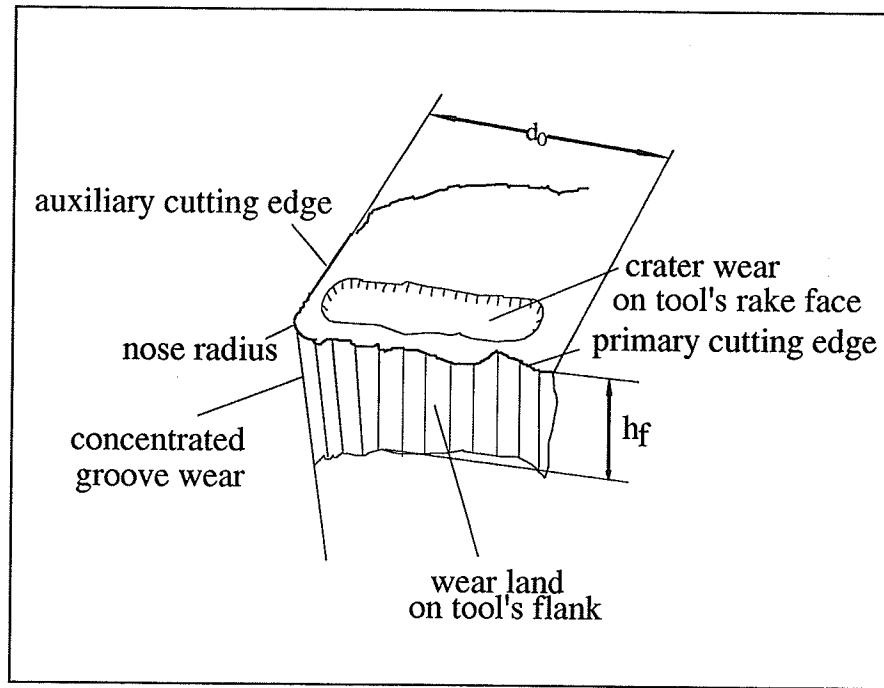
A magnified view of a tool bit showing flank and crater wear.
